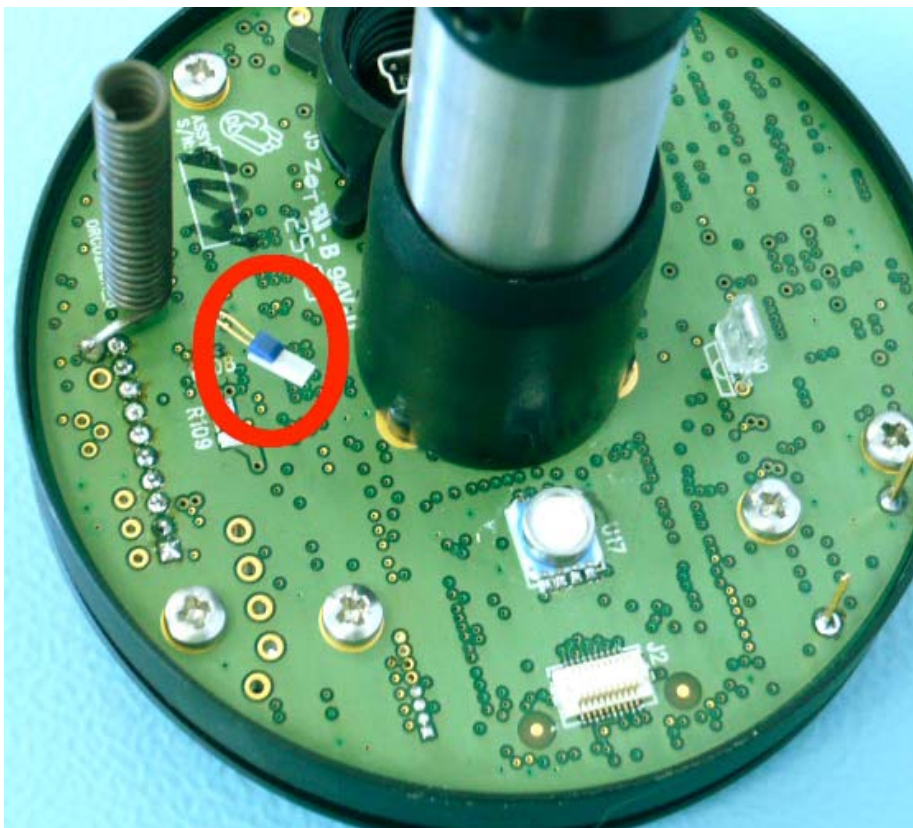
Subassembly provided by Deep Life Ltd to enable the OR_Apocalypse sensor to be photographed: on the OR_Apocalypse CO2 pod: the sensor is not normally scarcely visible inside a mounting fixture. The entire area is covered with a gel on the finished products, making the sensor even harder to visualise. The sensor is the small white object on leads in the left middle of this image, highlighted in RED. This is the same component as on the OR_Umbilical and OR_Incursion “scrubber stick” in the previous figure.
